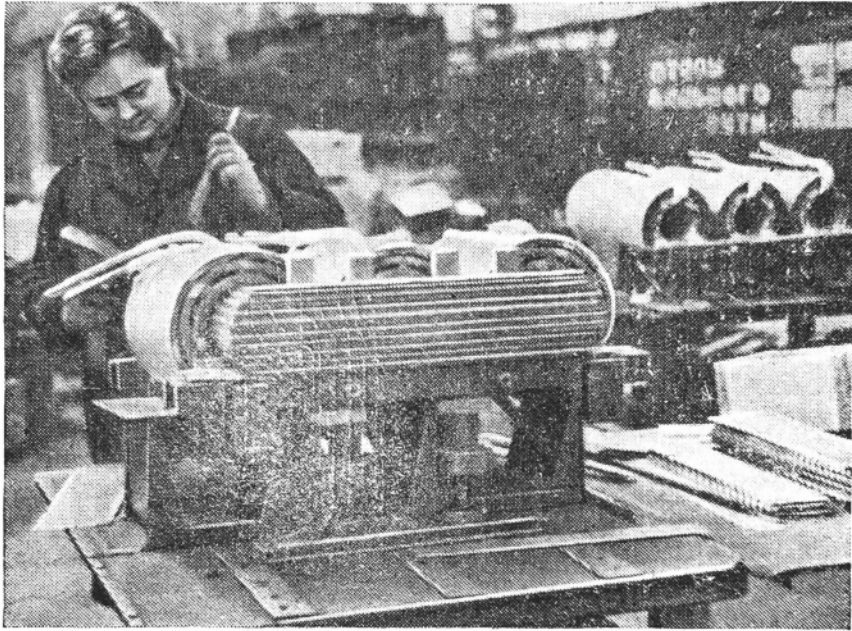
Assembly (interleaving) of the core directly with windings
